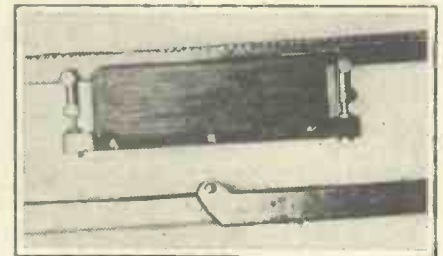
An adjustable saw stop which completely solves the problem of cutting slots in coil formers.
